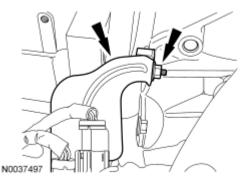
Locating Engine Wiring Harness Bracket And Nut Courtesy of FORD MOTOR CO.
